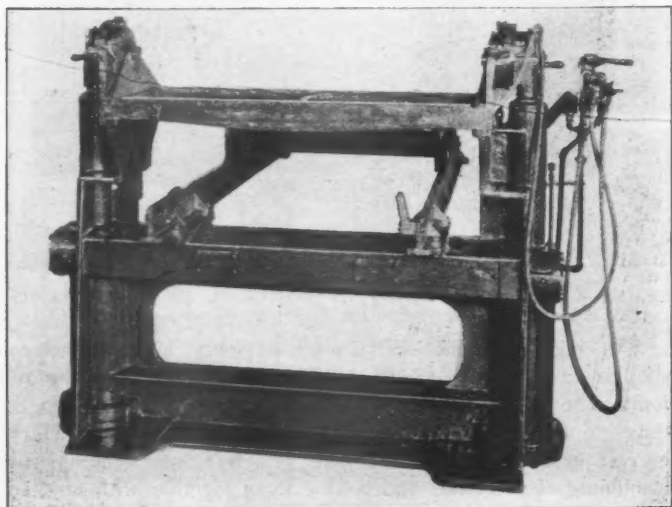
A SIMILAR MACHINE WITH MACHINED JOINTS ELIMINATED IN THE CASTING
